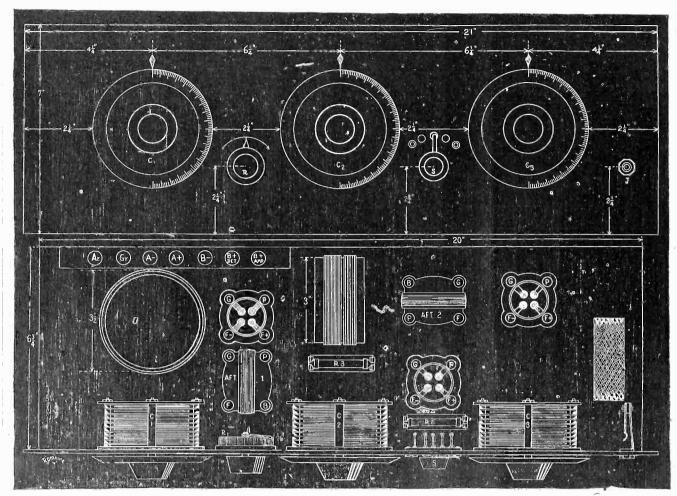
, the panel layout, and Fig. 3 the assembly plan of the set. Instead of the plate coils described in the article a boneycomb coil may be used. It is a 75-turn coil from which four 14 turns have been removed.
